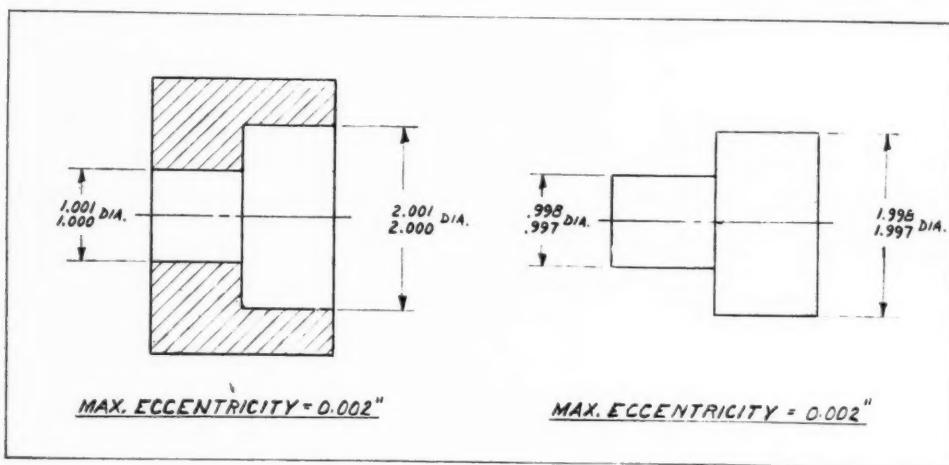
A working drawing of the part is then sent to the shop. Since clearance and eccentricity are indicated separately on each part, separate tolerances are less than tolerance allowed by design drawing
